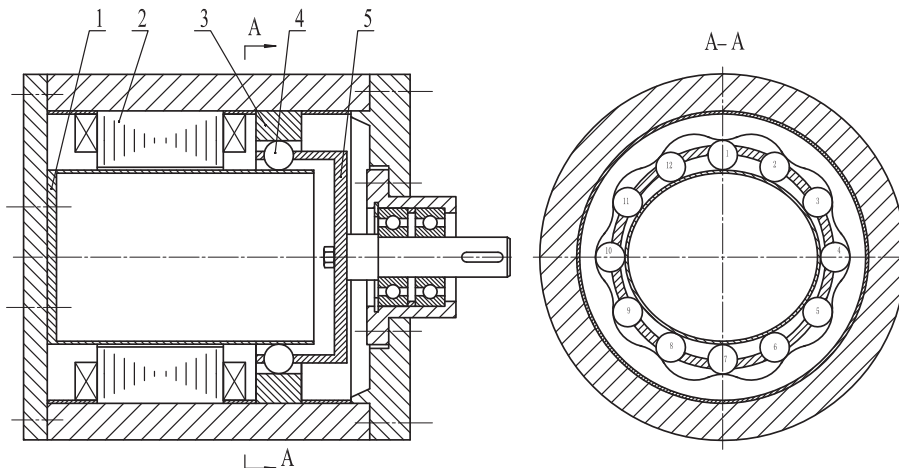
An electromagnetic harmonic movable tooth drive system. 1. flexible ring; 2. coils; 3. rigid gear; 4. movable tooth; 5. rotor.
